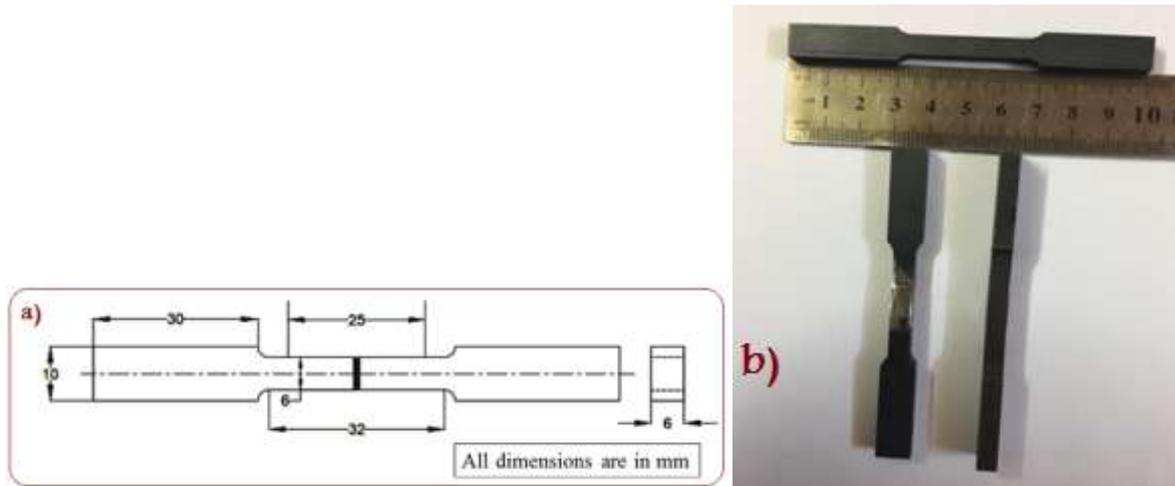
Shown tensile specimen: a) The standard dimensions of tensile testing specimen, b) Tensile specimen
